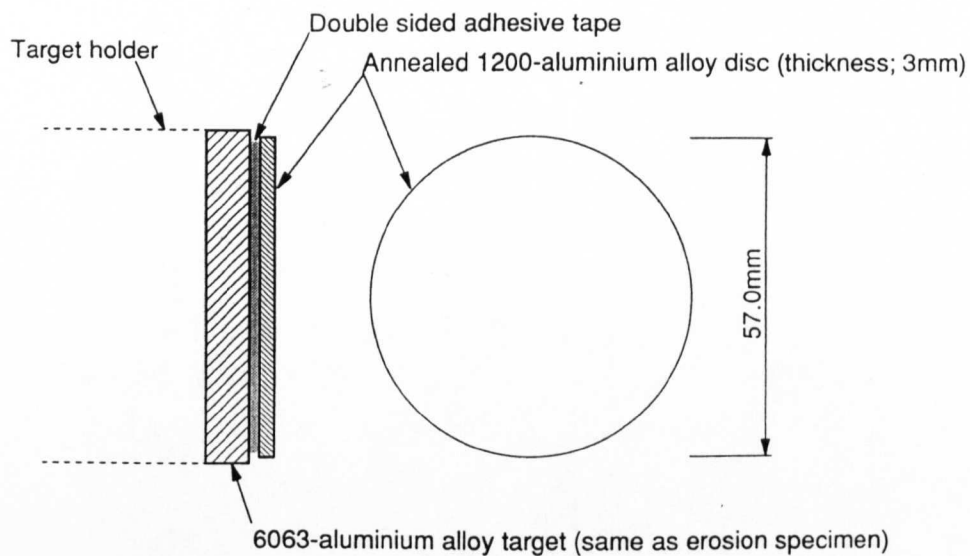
Specimen assembly of indentation counting tests. Material is annealed 1200-aluminium alloy (specimen disc).
